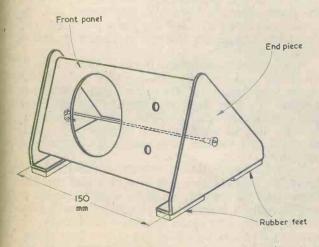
The case in its assembled form. There are four aluminium panels, a tie rod and four rubber feet
